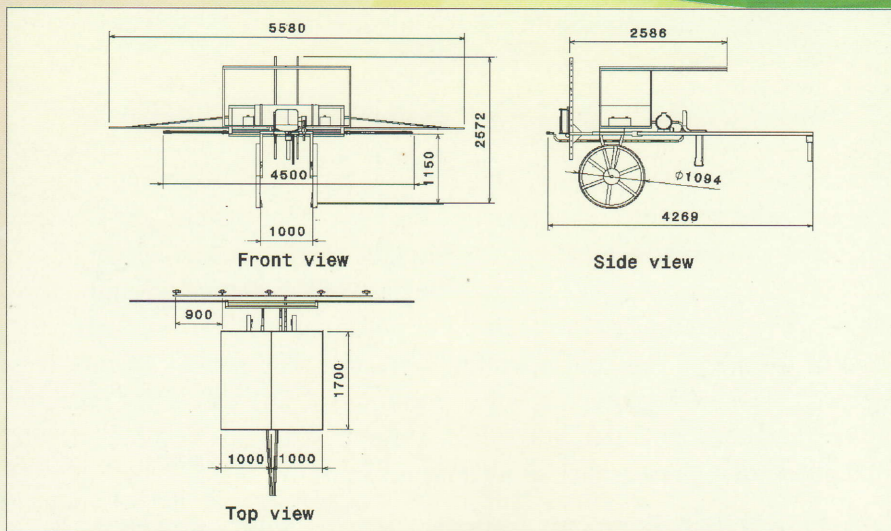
Front, side and top view of bullock drawn solar powered high clearance sprayer
